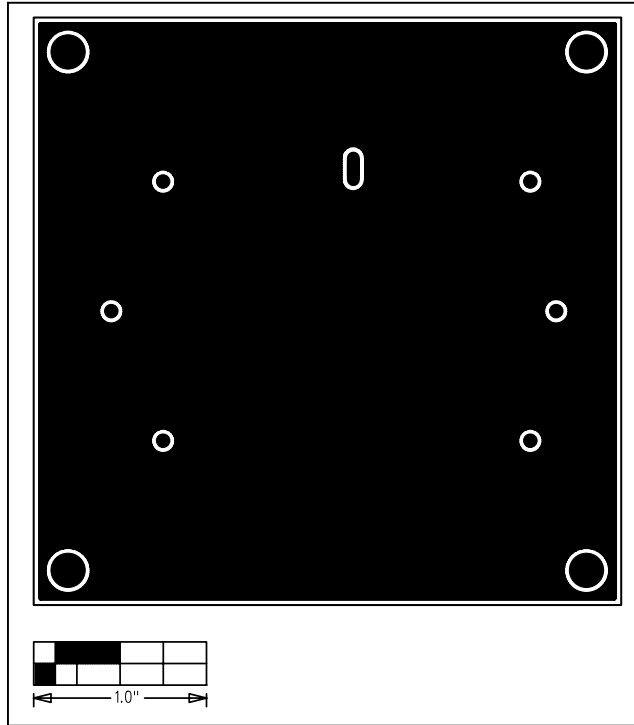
MAX9584 EV Kit PCB Layout—Solder Side
